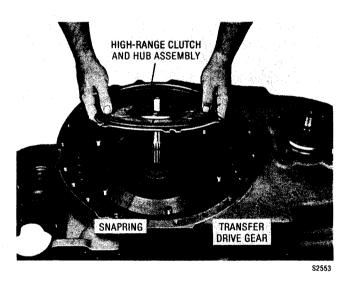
Installing high-range clutch and hub assembly (TT, TTB models without power takeoff)
